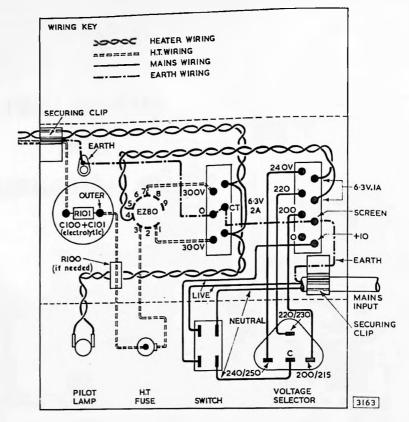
POWER UNIT ASSEMBLY AND WIRING DETAILS
